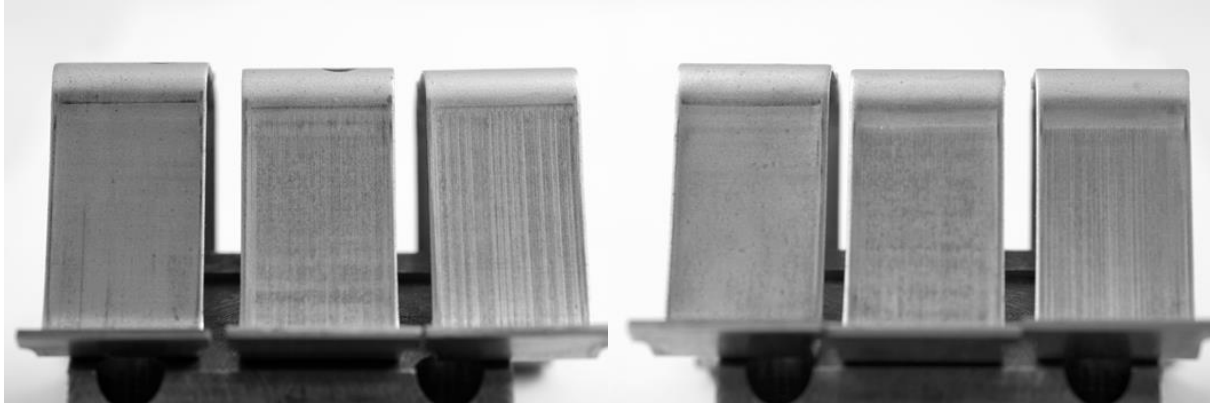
3D printed U-bend tools, topology optimized version to the left and solid tool to the right.
